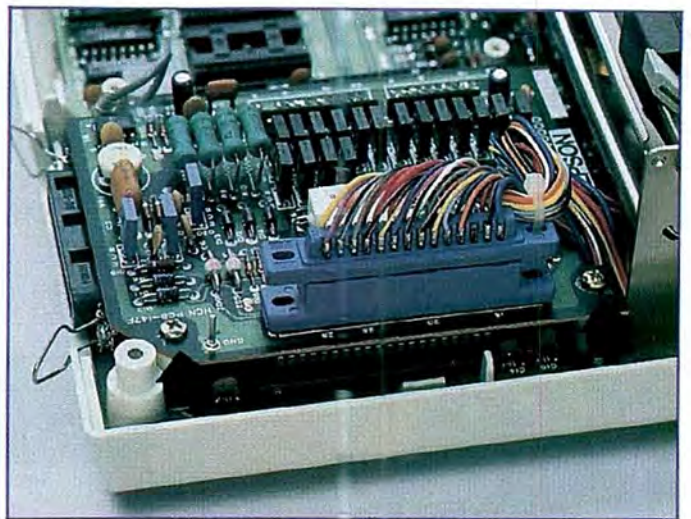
Remove the driver board from the control board by removing the two Phillips screws along the right side of the driver board.
